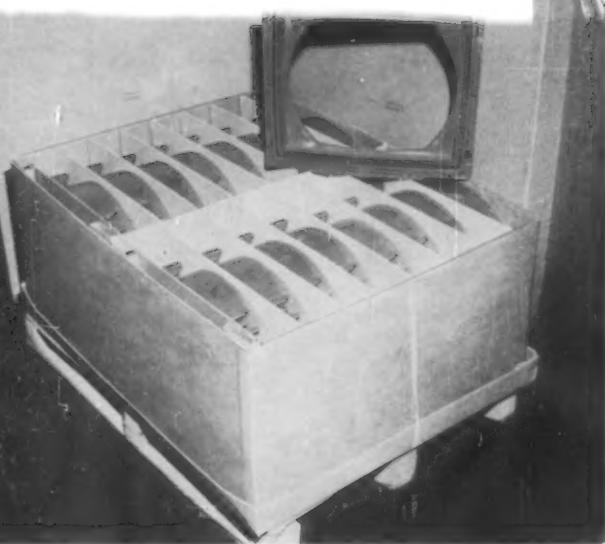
Another two-trip package. Carton used to ship molding material to molder is later modified to ship molded tube masks to TV maker. (Photo, GATX, Plastics Div.)
